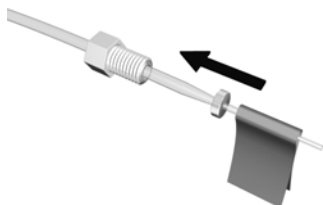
Sliding a Fitting and Ferrule over the Tubing
